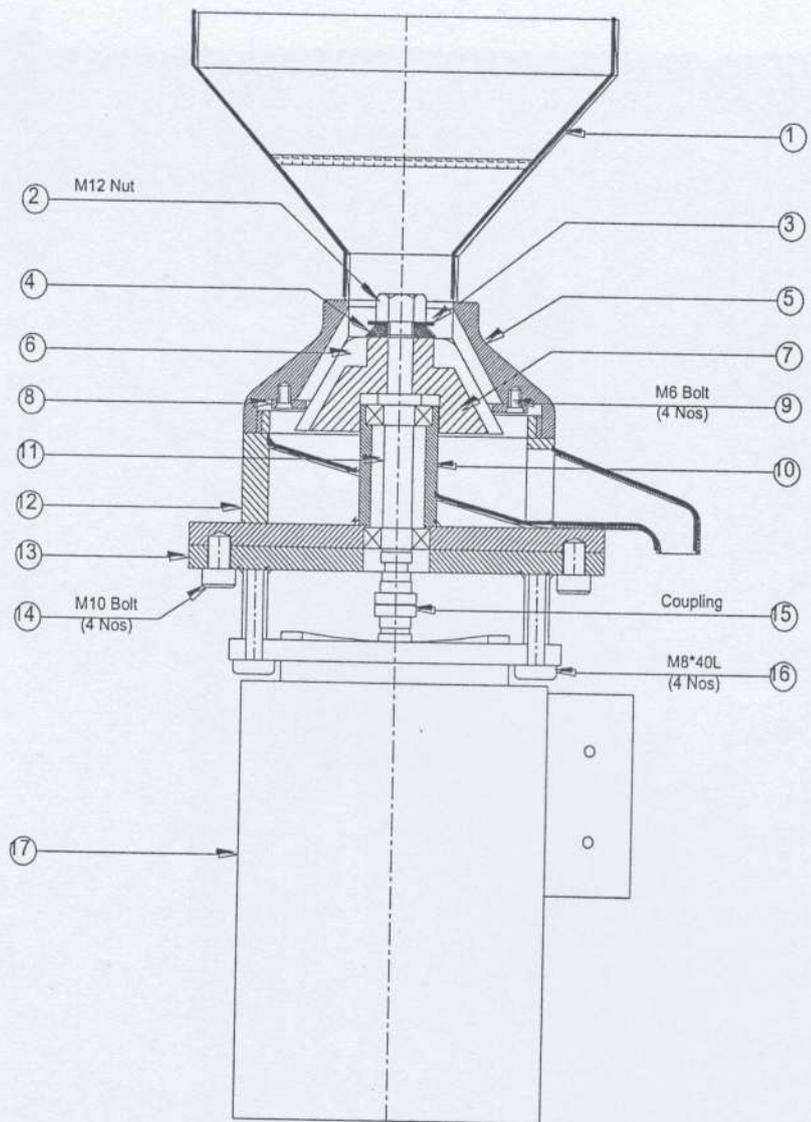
Engineering drawing of Modified-Improved continuous wet cum dry grinder.
